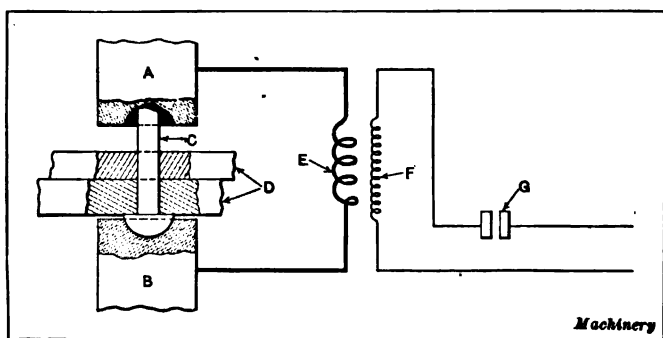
Diagram illustrating Application of Electric Spot-welding Machine for Electric Riveting, showing Electrical Connections
